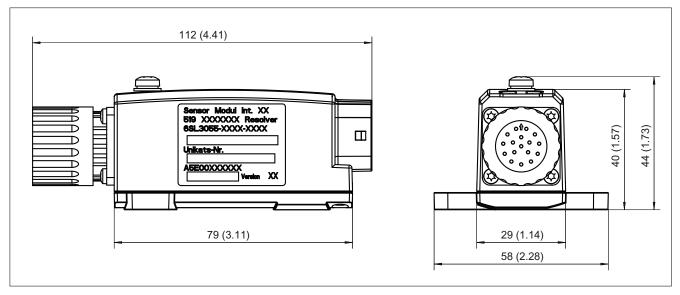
Dimension drawing of Sensor Module External SME25, all data in mm and (inches), order number 6SL3055-0AA00-5HA0
